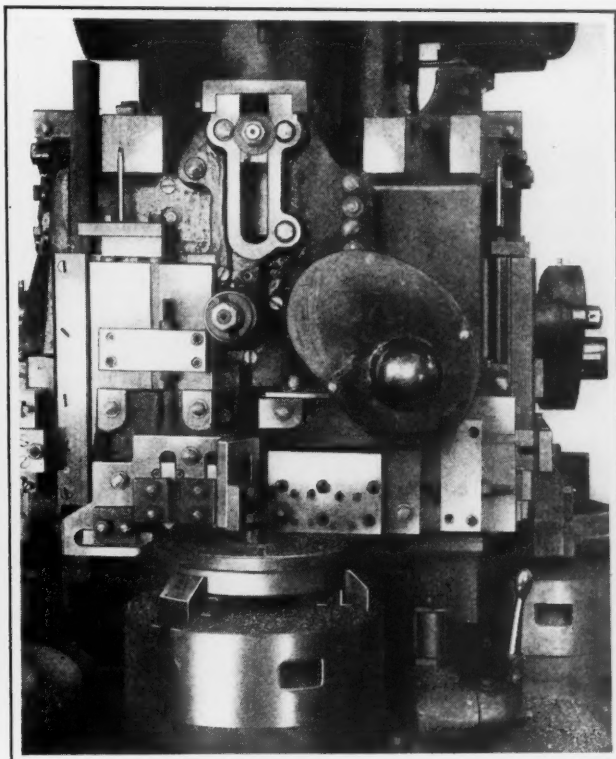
Second Unit of Continuous Machine—roughing the Engine Side
